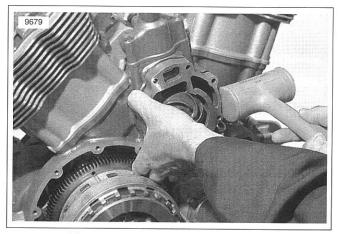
Removing Water Pump (clutch cover removed for clarity)
